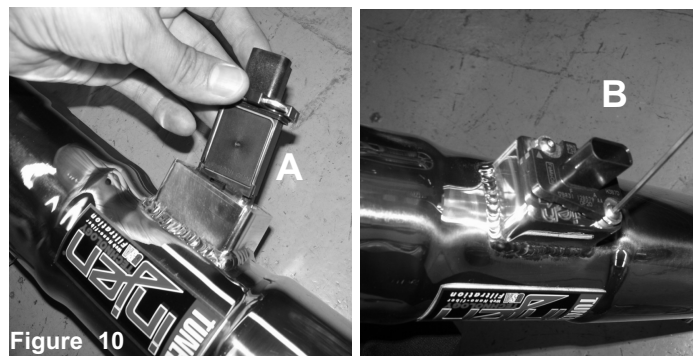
A) Install the MAF sensor into the Injen intake tube.
